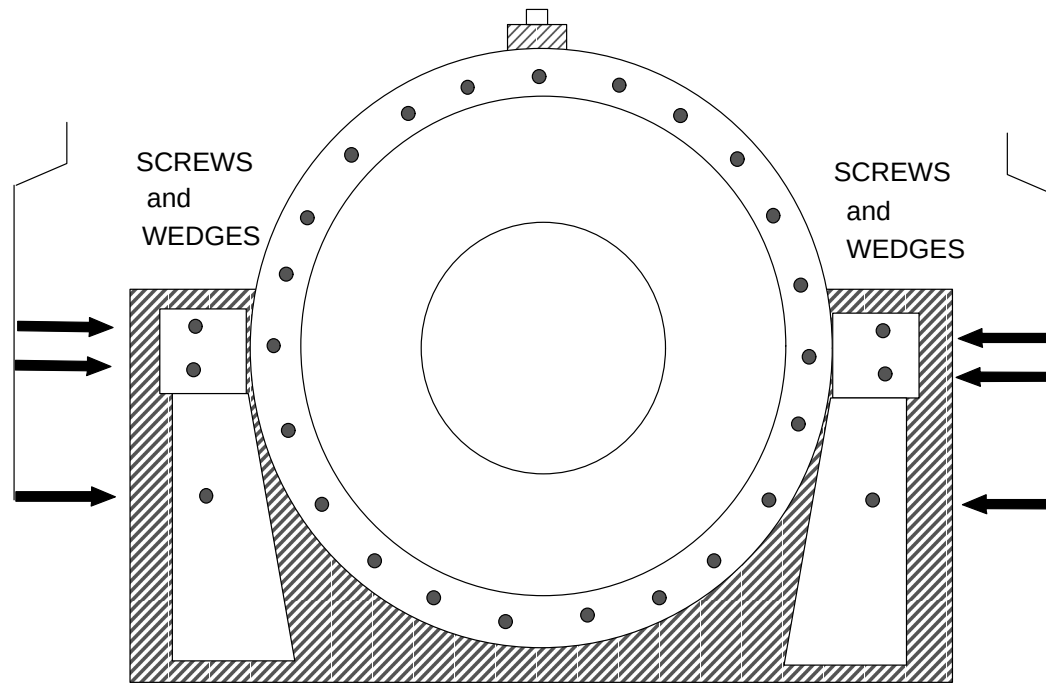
MOUNTING SCREWS FOR PHANTOM WEDGES
